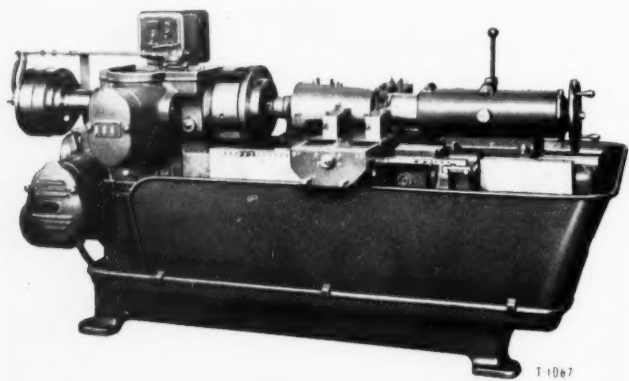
Model 10 Stub Lathe with long bed, special headstock and spindle drive for turning tapered plugs.
